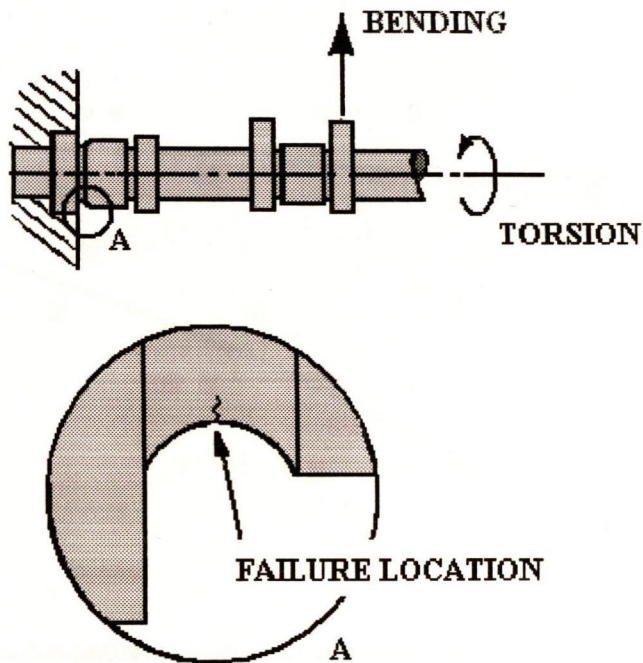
Camshaft component, showing loading and details of the notch which caused failure
